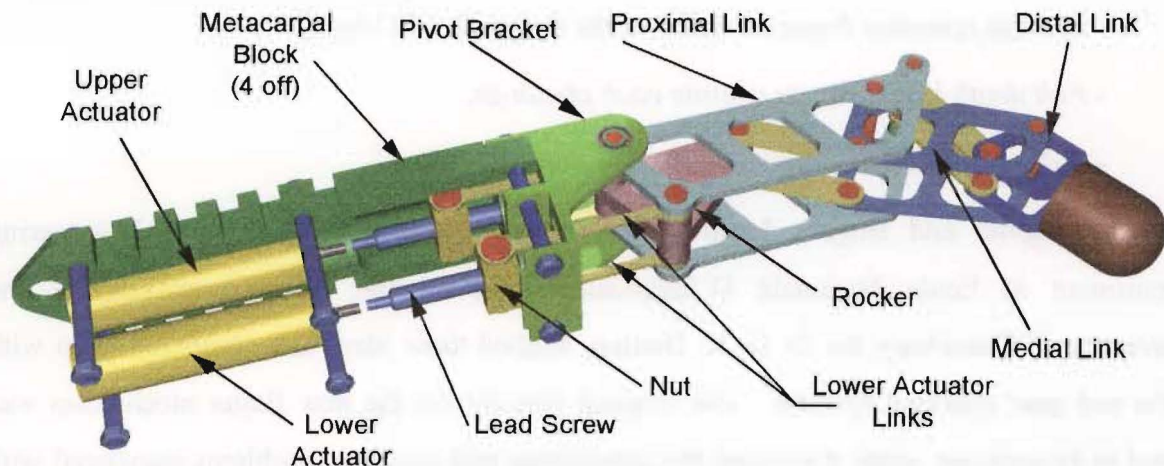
Picture of an assembled finger generated from the CAD model produced by Monier and Magnier [1993]. Three of the metacarpal blocks have been removed to show the actuating motors and screws.
